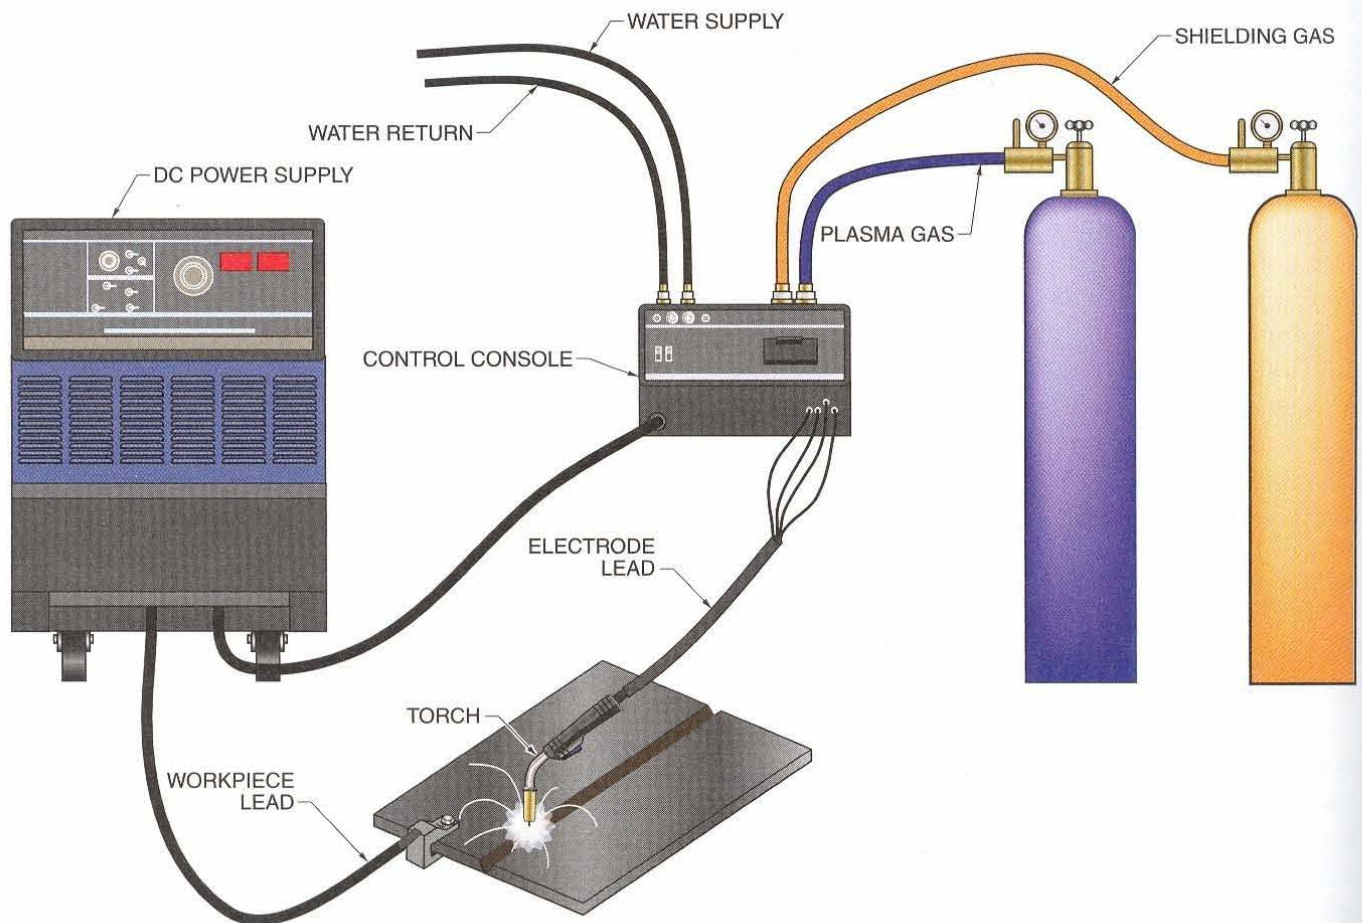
The PAW welding circuit includes a DC power source, control console, water supply, plasma gas and shielding gas supply, welding cables, and torch.
